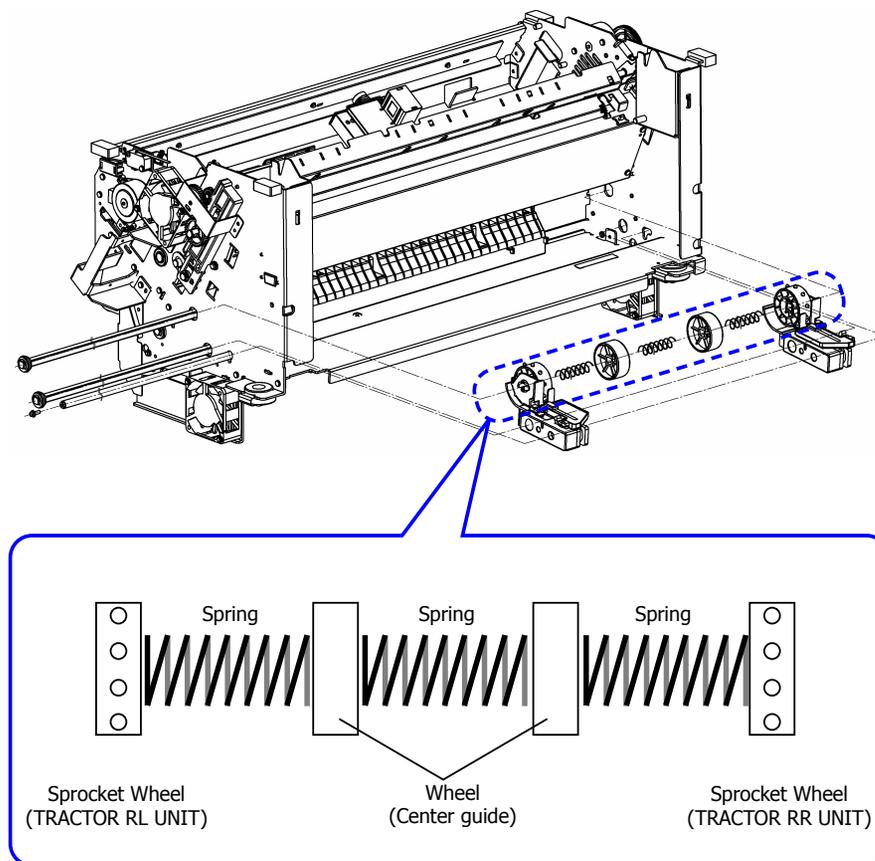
Reassembly of TRACTOR RL/RR UNIT
